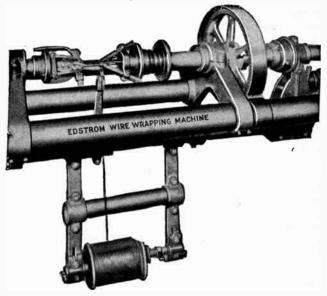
How cable wrapping machine serves cable ends with wire under tension
